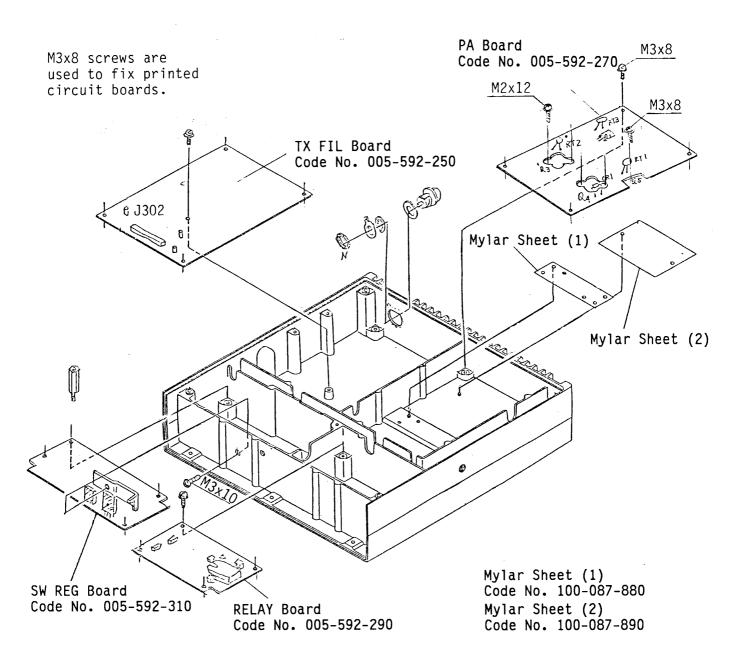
Disassembly of P.C. Boards from Top Chassis
